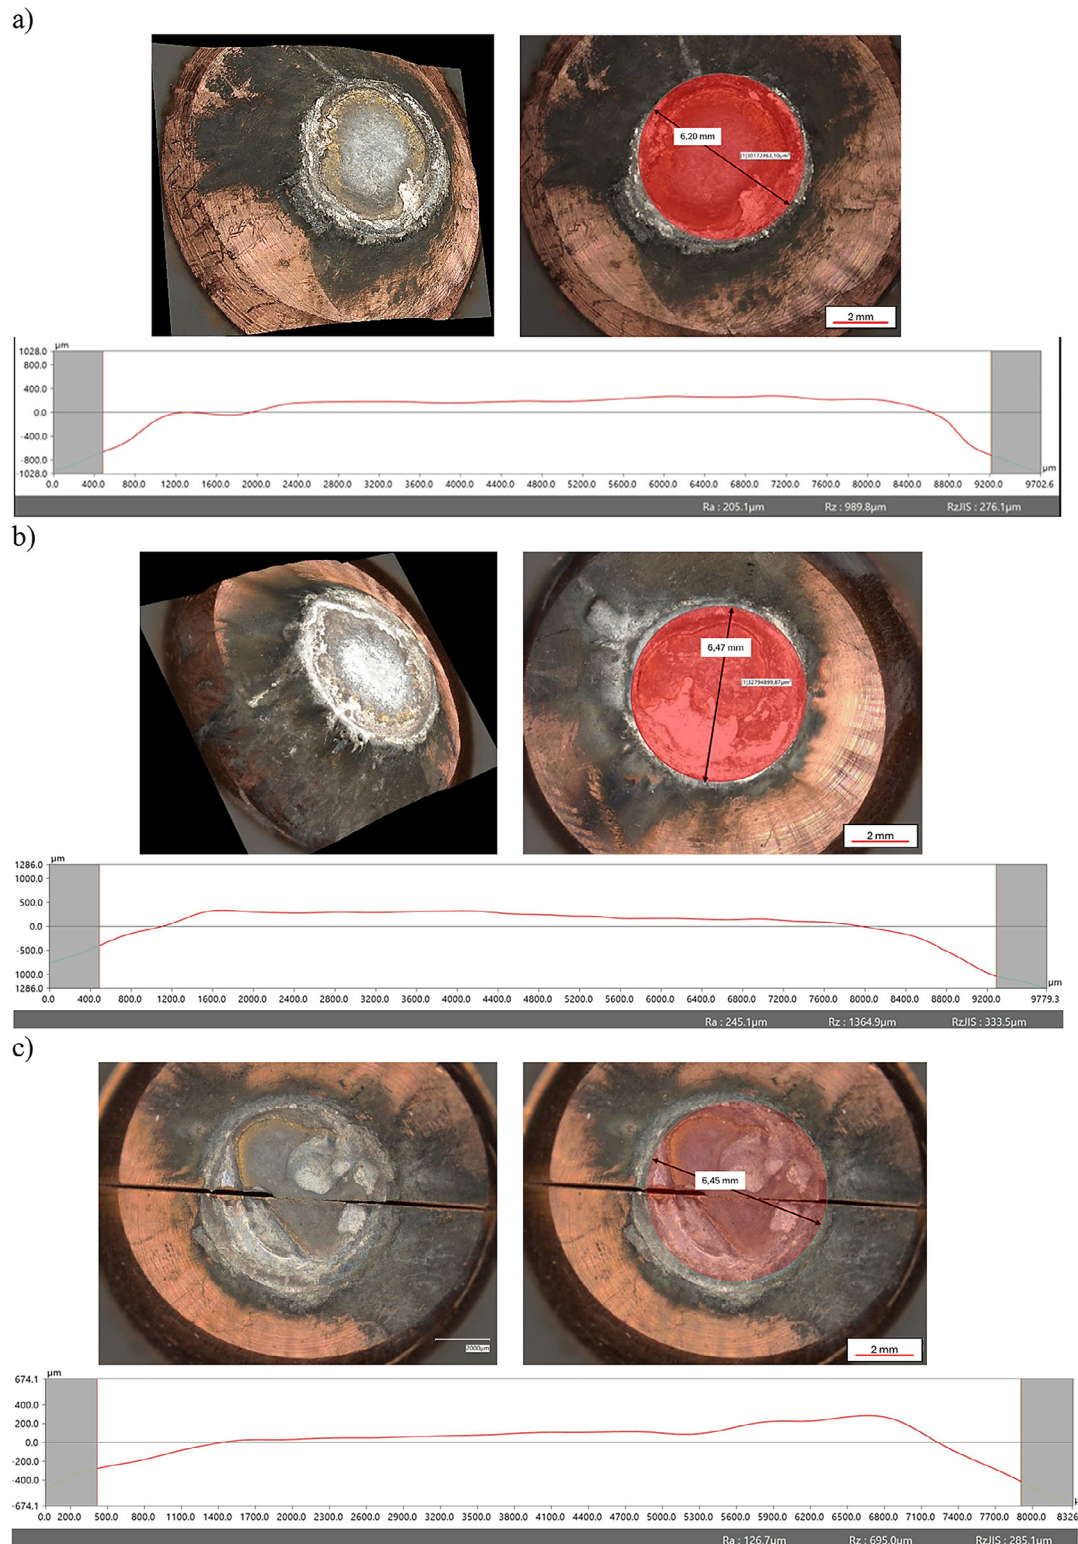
Macroscopic image of the electrode after (a) 300, (b) 500 and (c) 1100 welds with their roughness profiles
